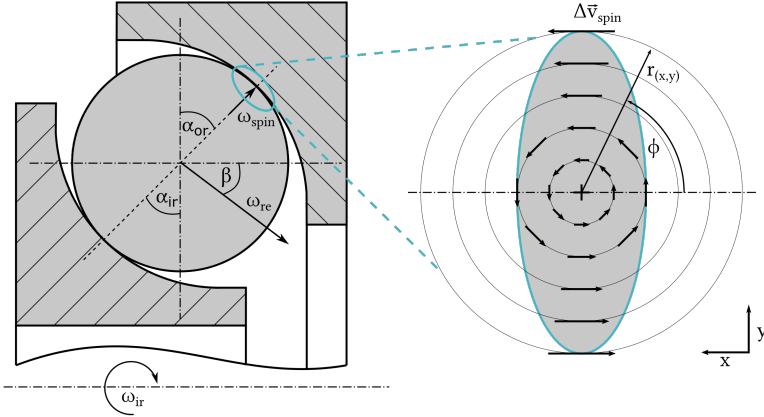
Illustration of the slip component due to spin in a ball bearing with a contact angle $\alpha \neq 0$.
